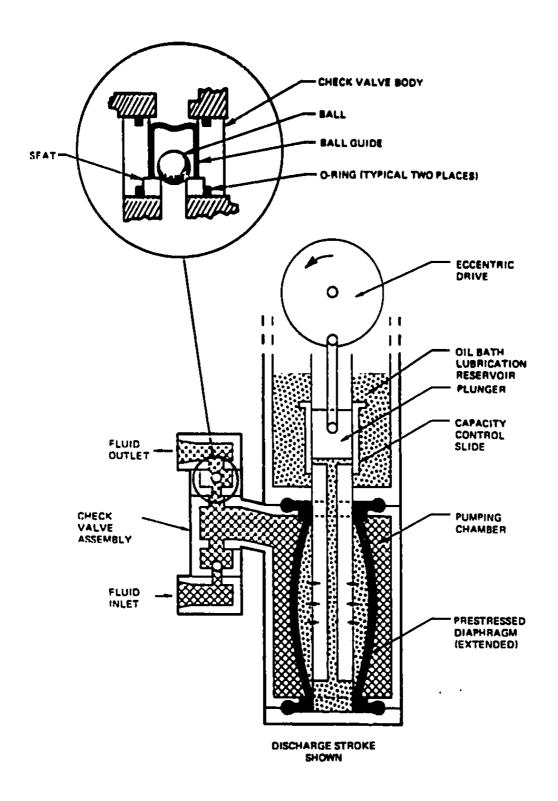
BIF Model 1731-12-9511 Crankshaft-Driven Balanced Tubular Diaphragm Pump
